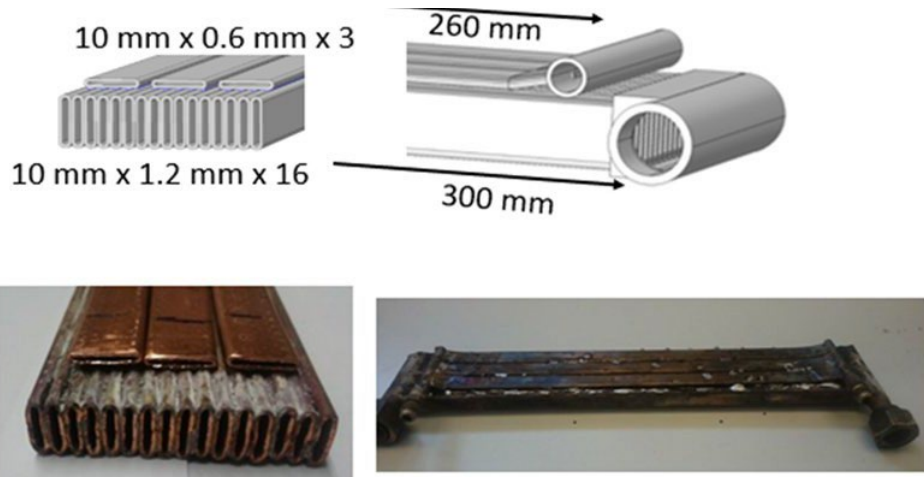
Drawing and photo of prototype internal heat exchanger of the EcoPac unit. (From Ölen, V., et al. 2022)
